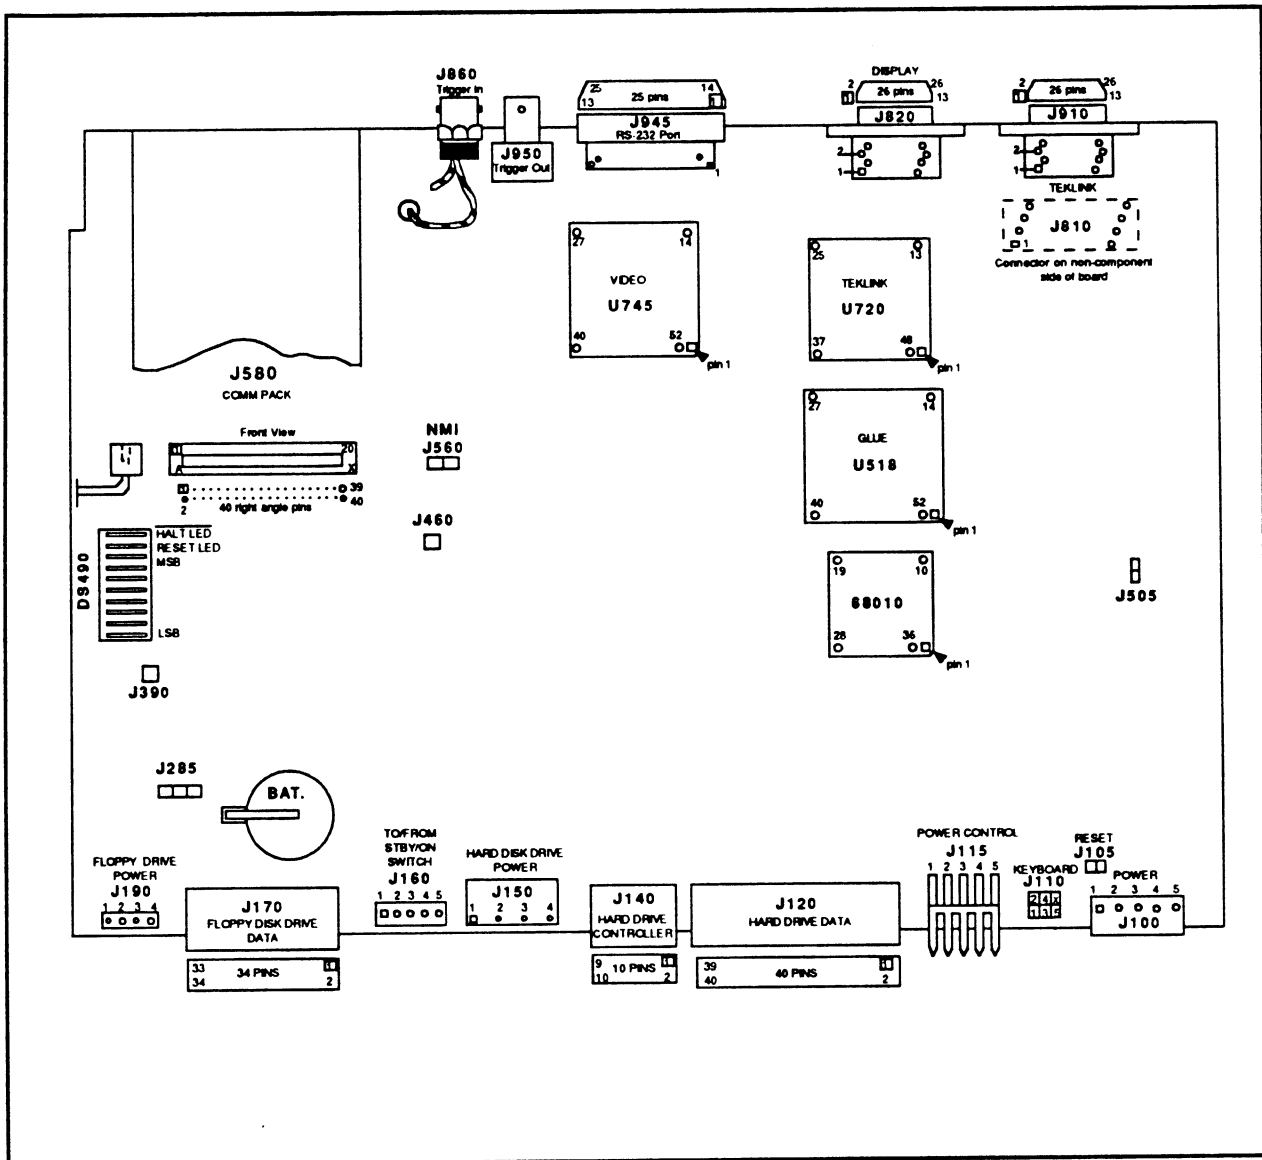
671-0058-00/01 MPU board connectors and pin keying.
